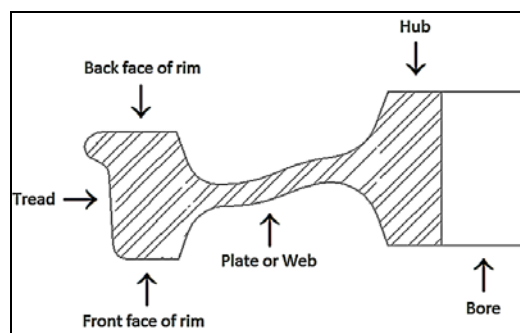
PARTS OF A RAILROAD WHEEL [2]
